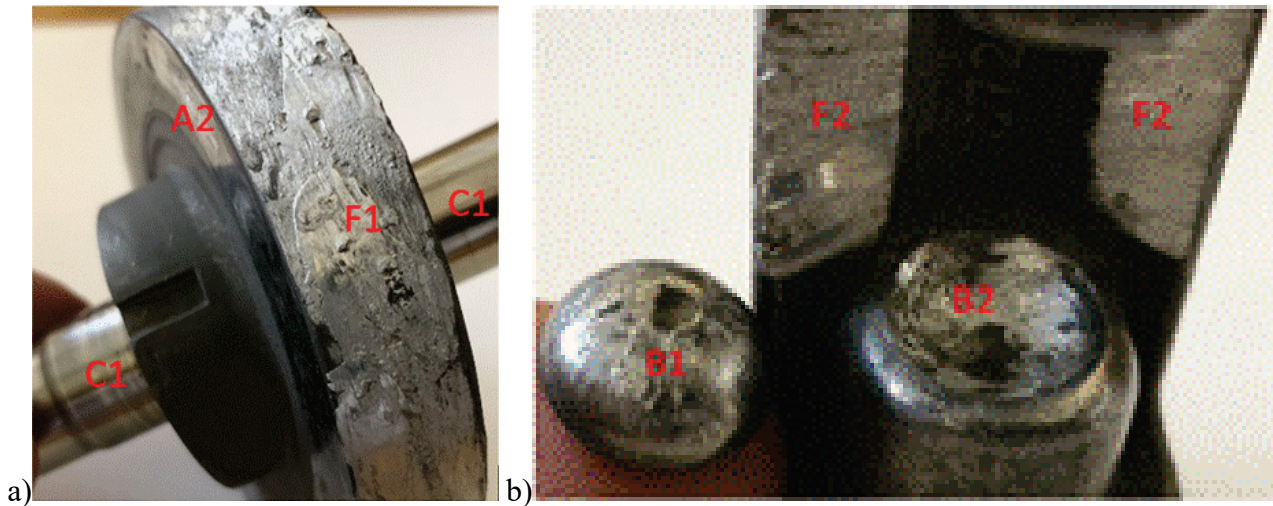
The damaged surfaces of: a) the spatial disc cam and its shaft, b) the piston and the tappet
